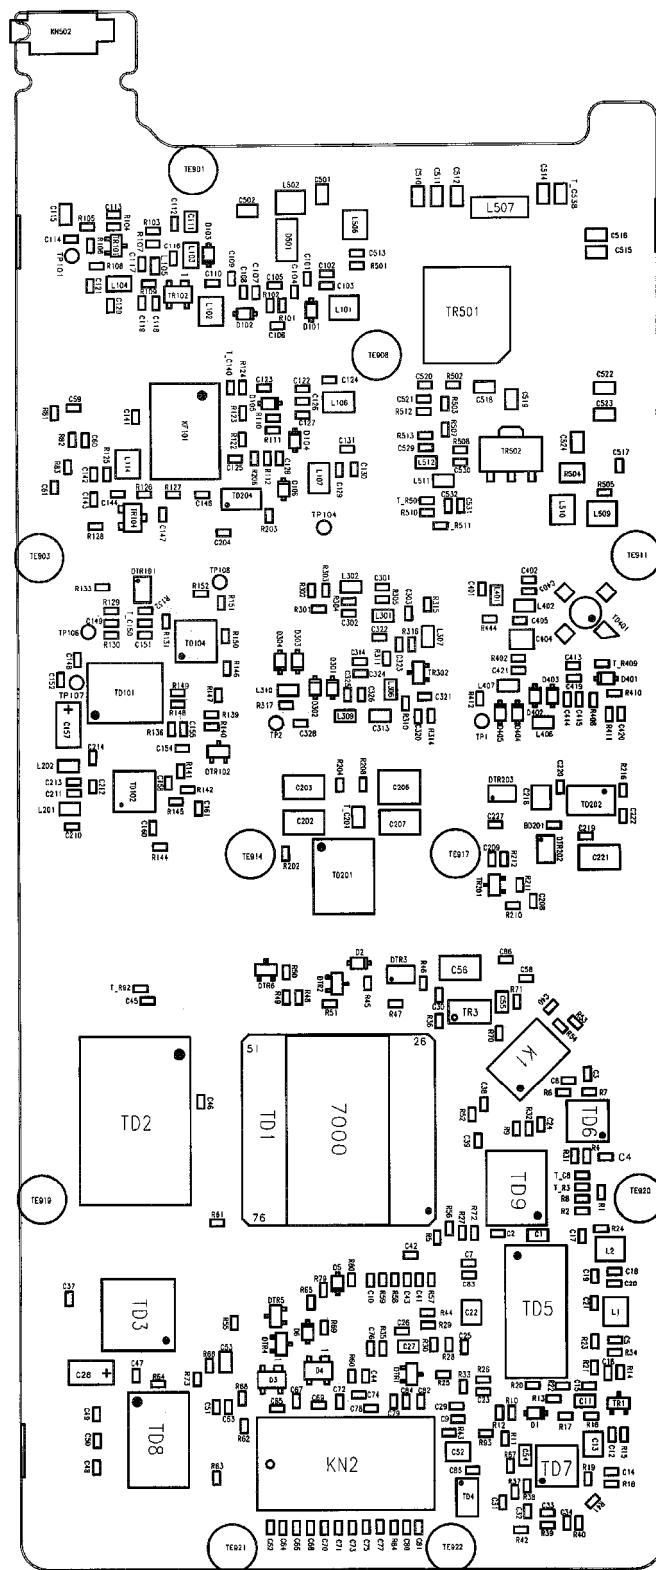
UHF RF and Control PCB Assembly Top Side
